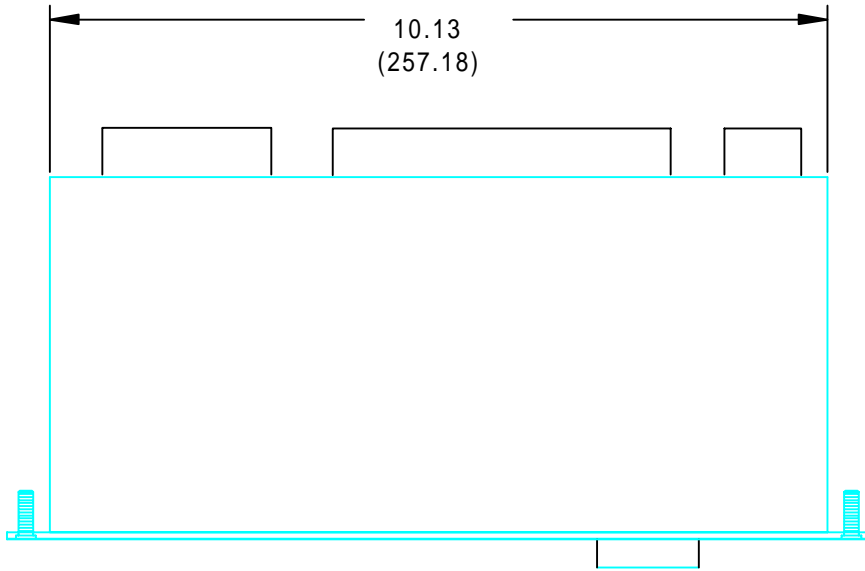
DGC-2000 Overall Dimensions In Inches (Millimeters)
